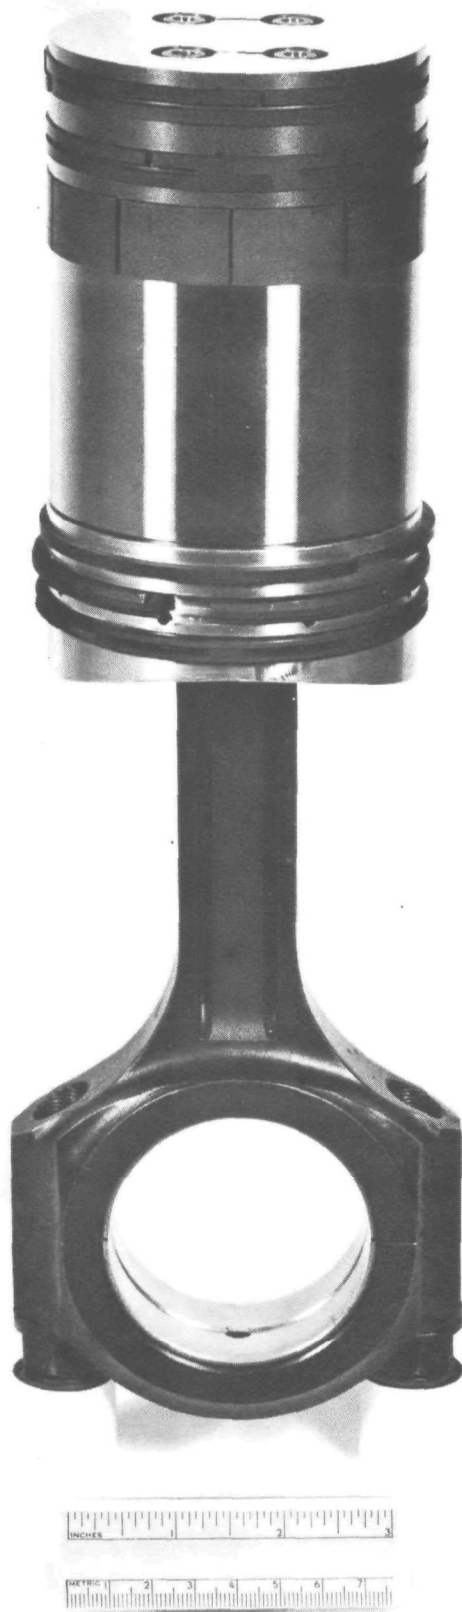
Trunk Piston and Rod Assembly (Graphite Rings)
